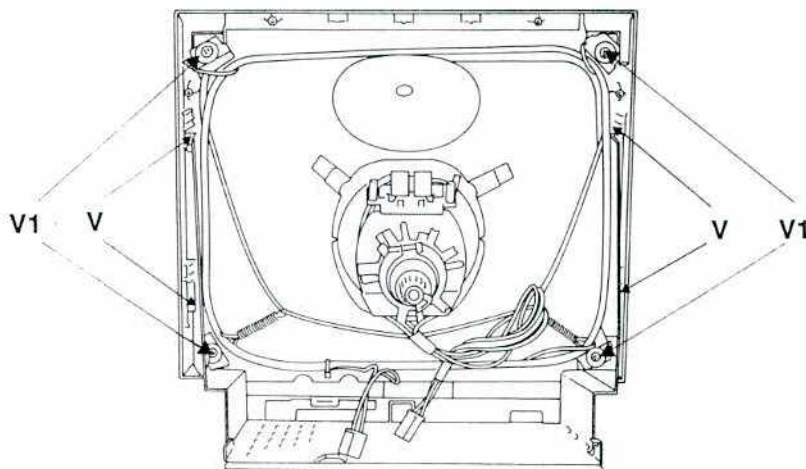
Removal of sheet metal bracket and of picture tube.
